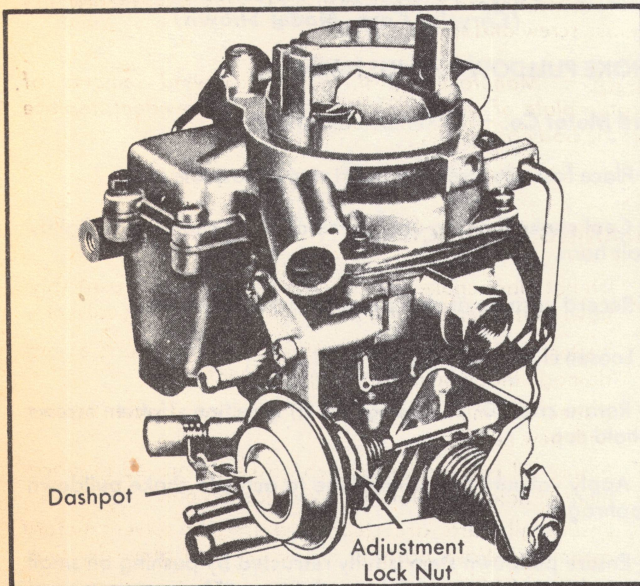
View Of Carburetor Showing Dashpot Adjustment (Chrysler Man. Trans. Models Only)
